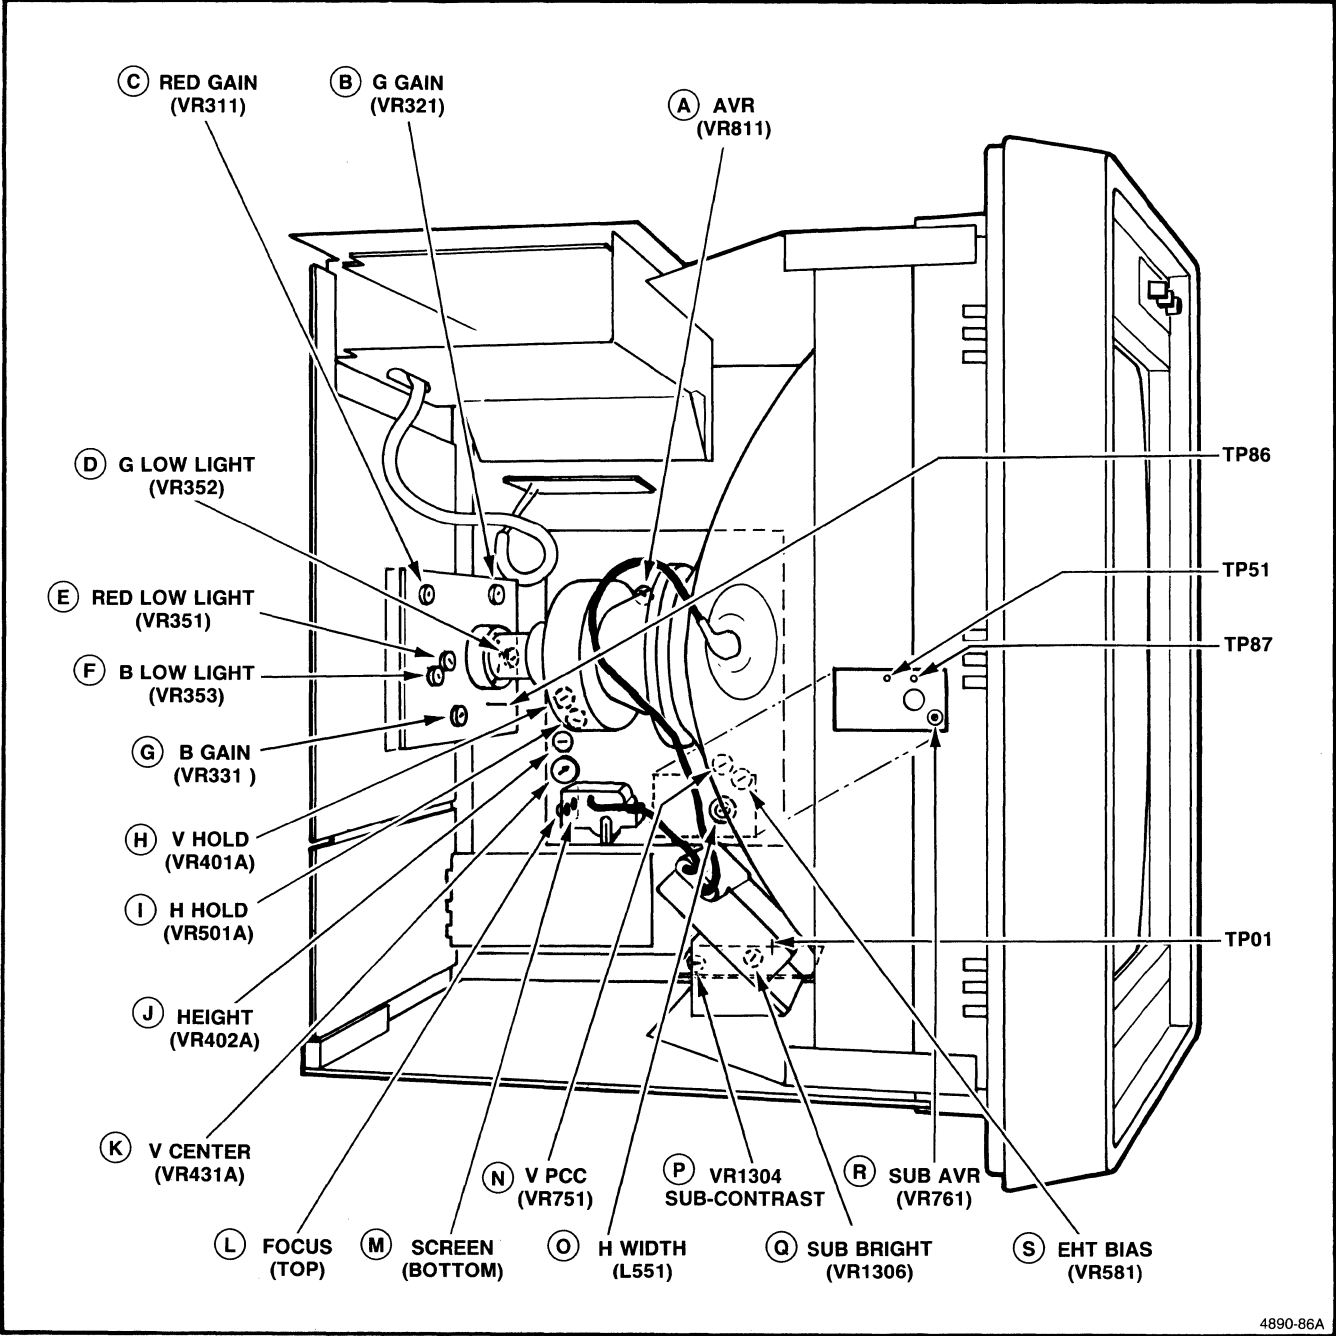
119-2023-00 Display Module Test Points and Adjustments.
